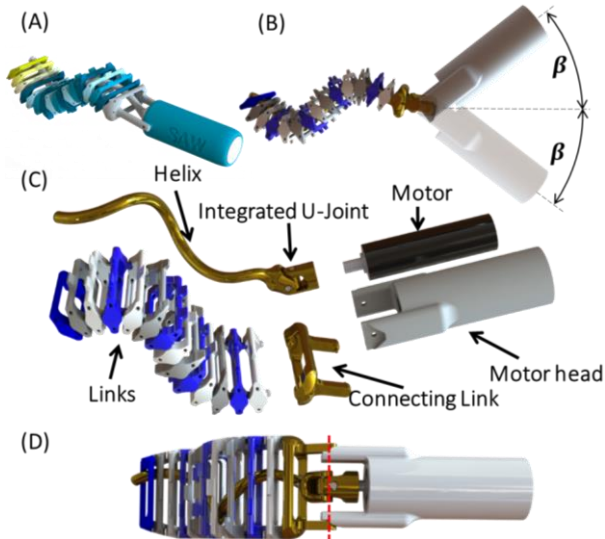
(A) The previous simple SAW design (without a passive bending joint). (B) The new design with a bending joint. The tail can bend relative to the head by  $\pm\beta$ . (C) An exploded view of the novel design which is comprised of a motor housing, a motor, a helix with an integrated U-joint, a connecting link, and a set of 15 links forming the tail. (D) The head design in which the axes of rotation of the connecting link and the U joint of the helix are co-linear, ensures smooth wave motion while preventing unwanted fluctuations.
